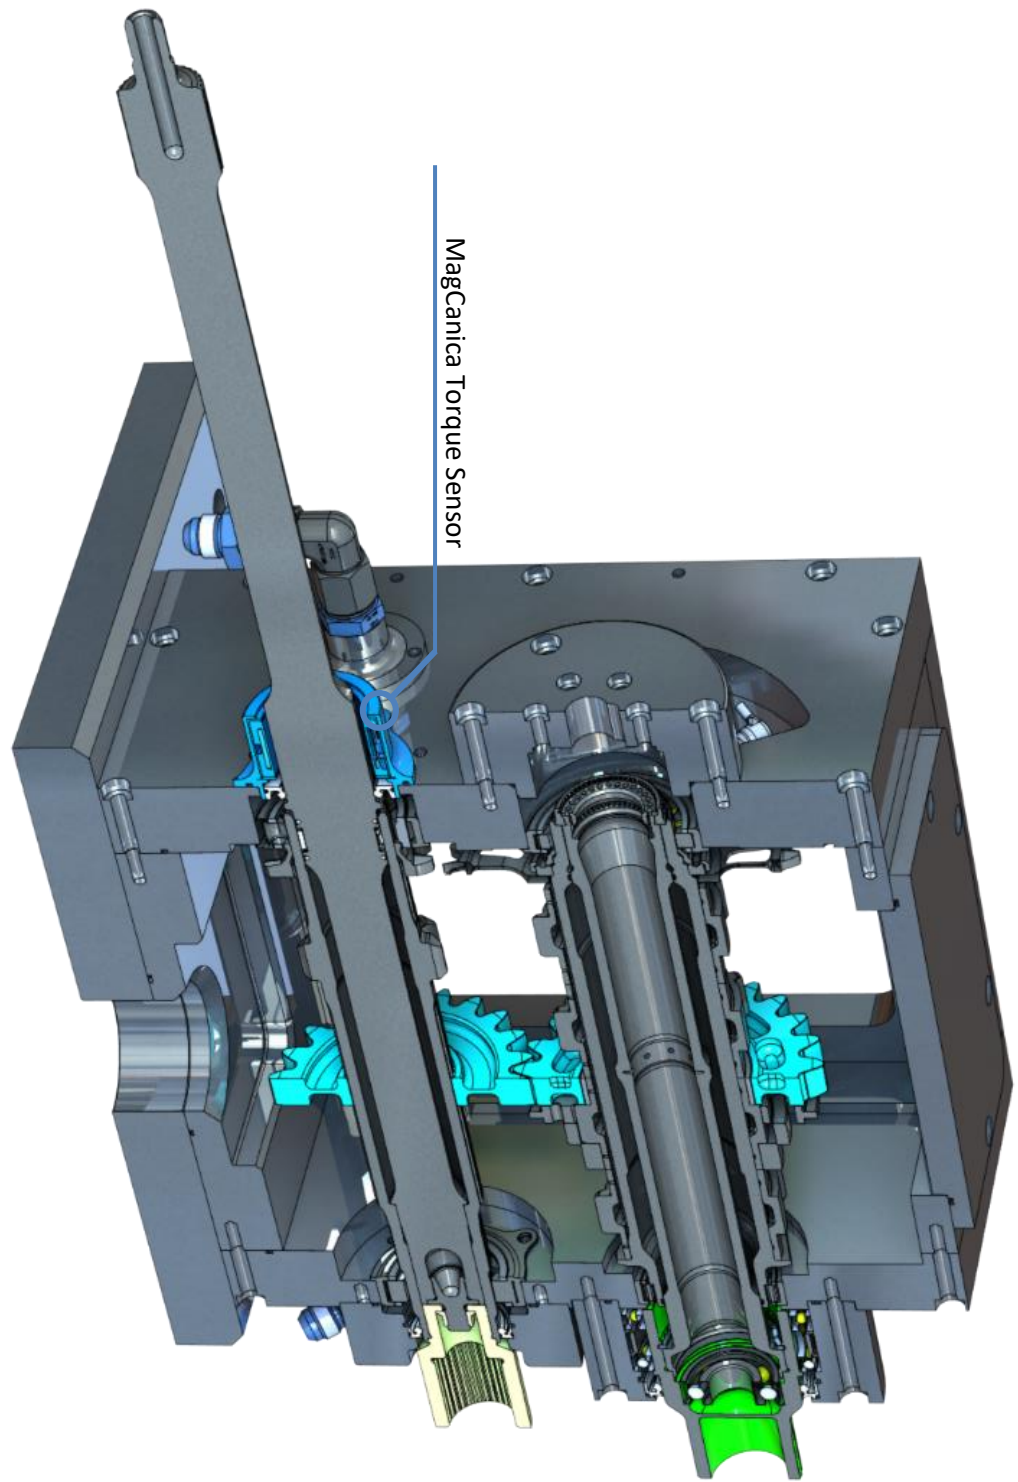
Sectioned Cardiff gear test rig test housing.
